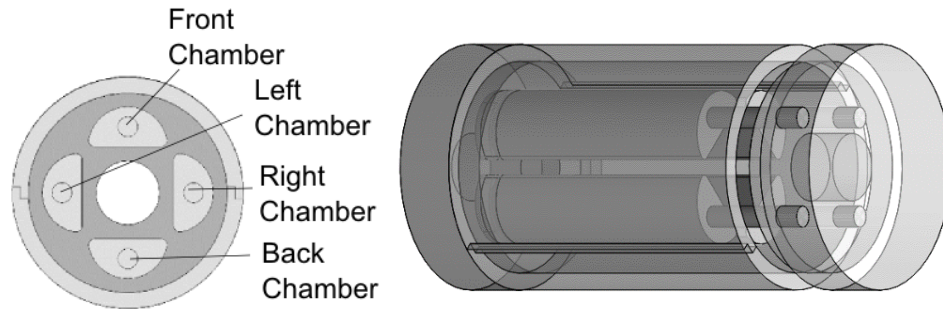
design of the proposed MOLLUSC (Multi Level Stiffness Controllable) manipulator (left) top view of the mold, (right) side view of the mold
